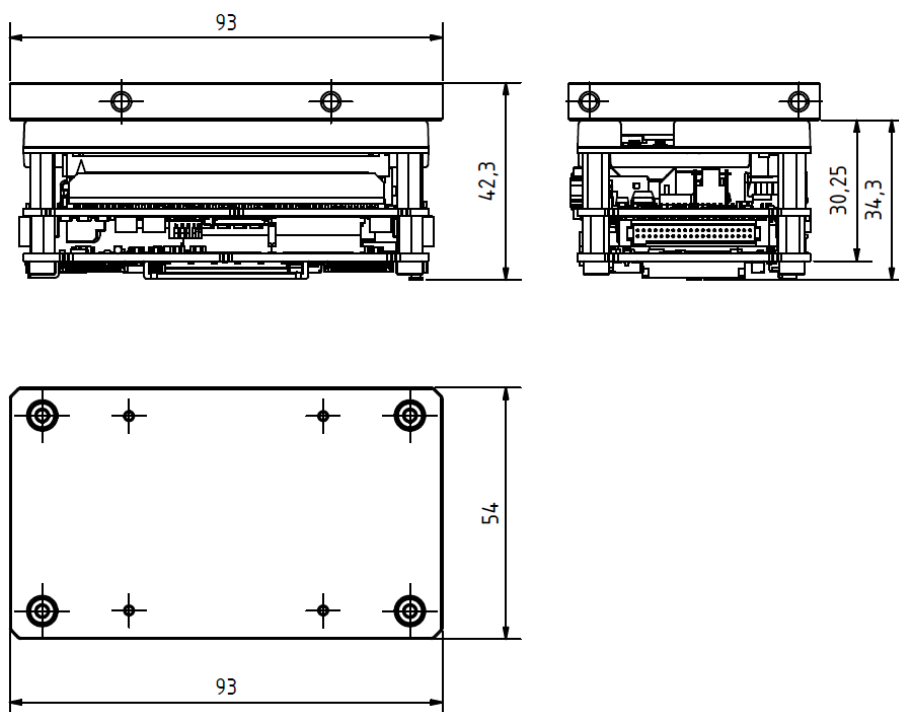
, dimensions XEC2-4P-X2G2 system without fan / heat sink
